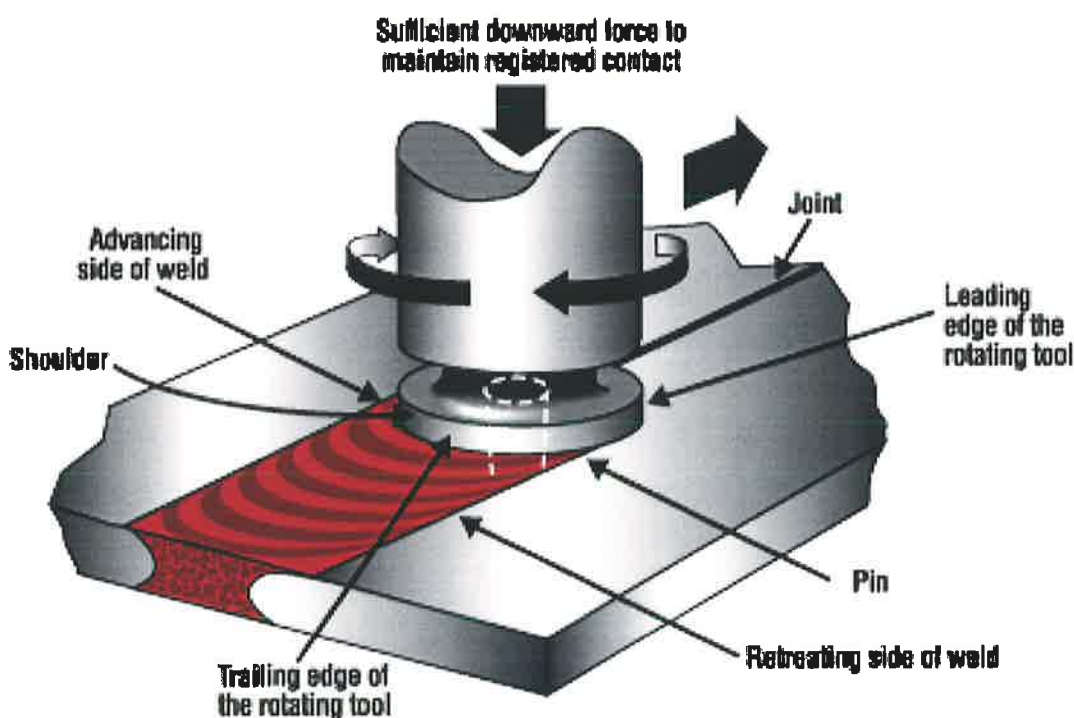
FSW: depicting a plunged and rotating tool traversing the workpiece [68].
